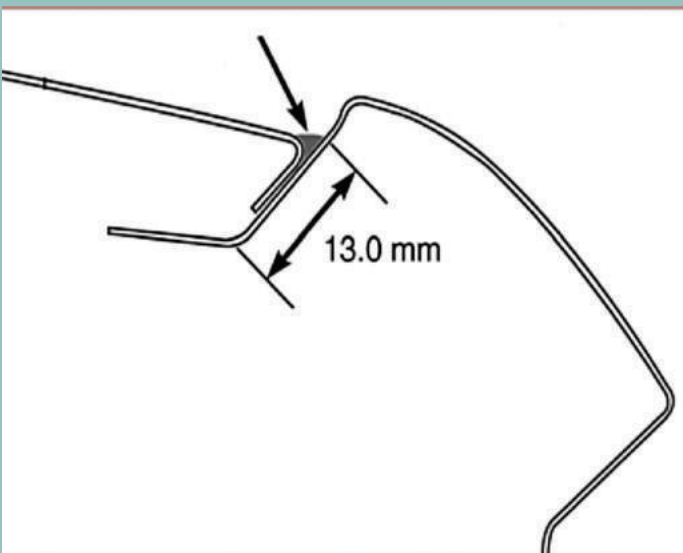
Right - shows the options for sectioning the outer body side aperture;
